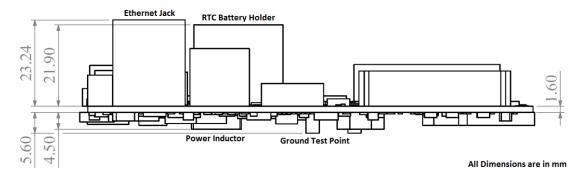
Mechanical dimensions of i.MX 8 QM/QP Qseven Carrier Board - Side View
